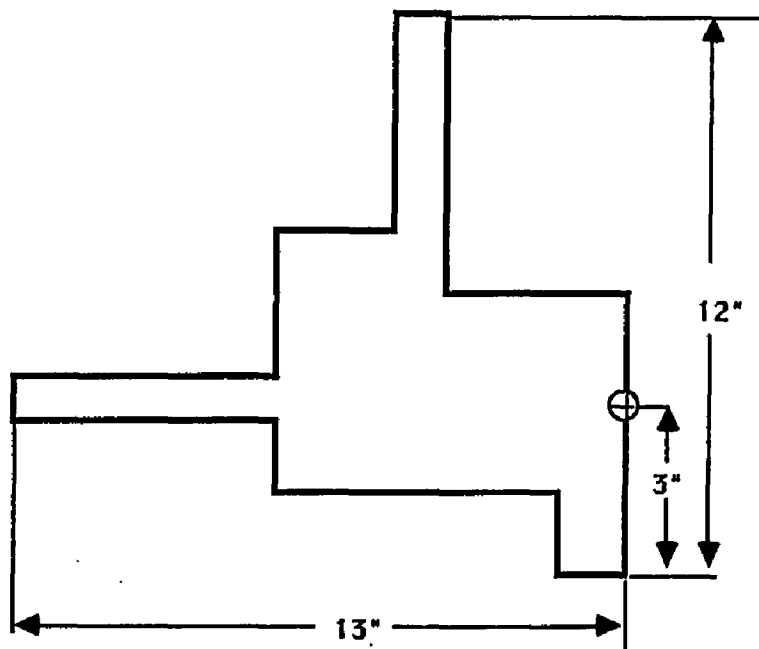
Wire Cutter Footprint in the Wire-Harness Assembly Problem
